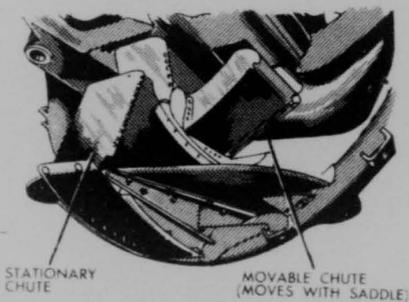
Bottom View of Guide Chute for Tail Turret.
